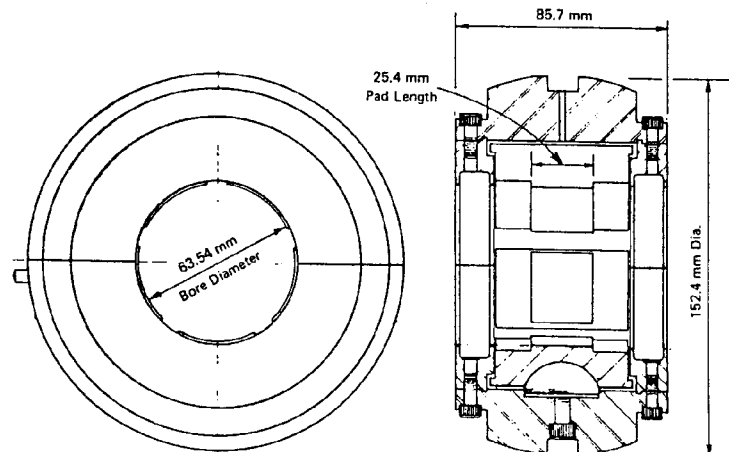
Engineering drawings of the special test bearing used for eccentricity measurements
